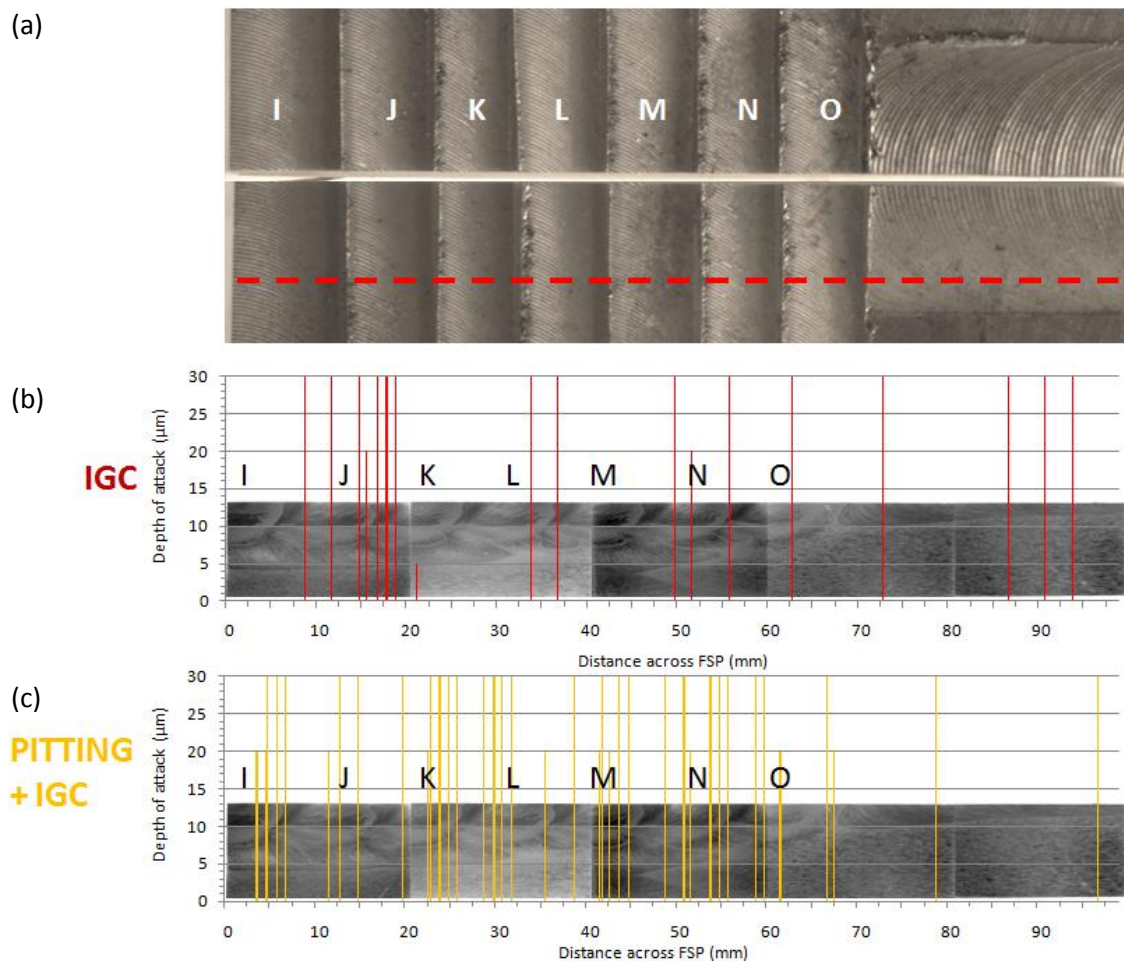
A series of optical macrographs showing the locations and depths of attack for; (a) the TMAZ of the FSW and the retreating side of the hot FSP for (b) IGC attack, and (c) pitting with IGC attack
